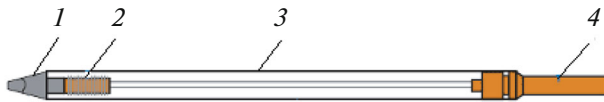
Induction soldering iron: (1) tip, (2) induction heater winding, (3) shielding casing, and (4) connector.
